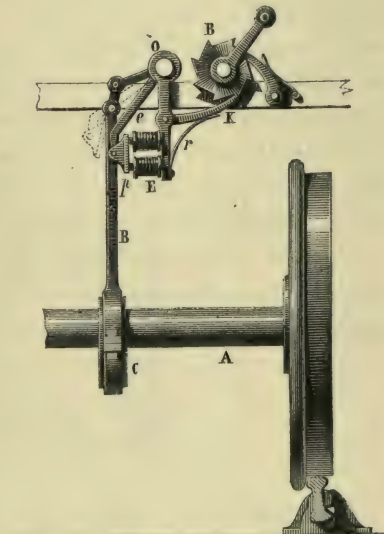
Achard's electric brake: mechanism for throwing out of gear.
